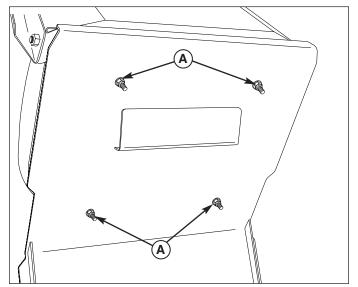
Install the Seat A. 5/16-18 Nylock Flange Nuts
